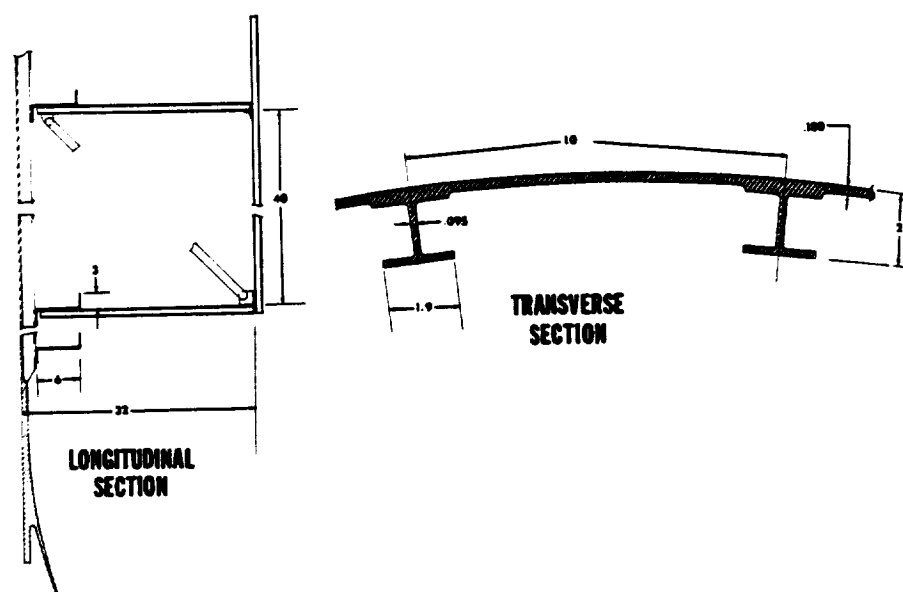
Cross-sections of the C-5 Booster tank assembly.
